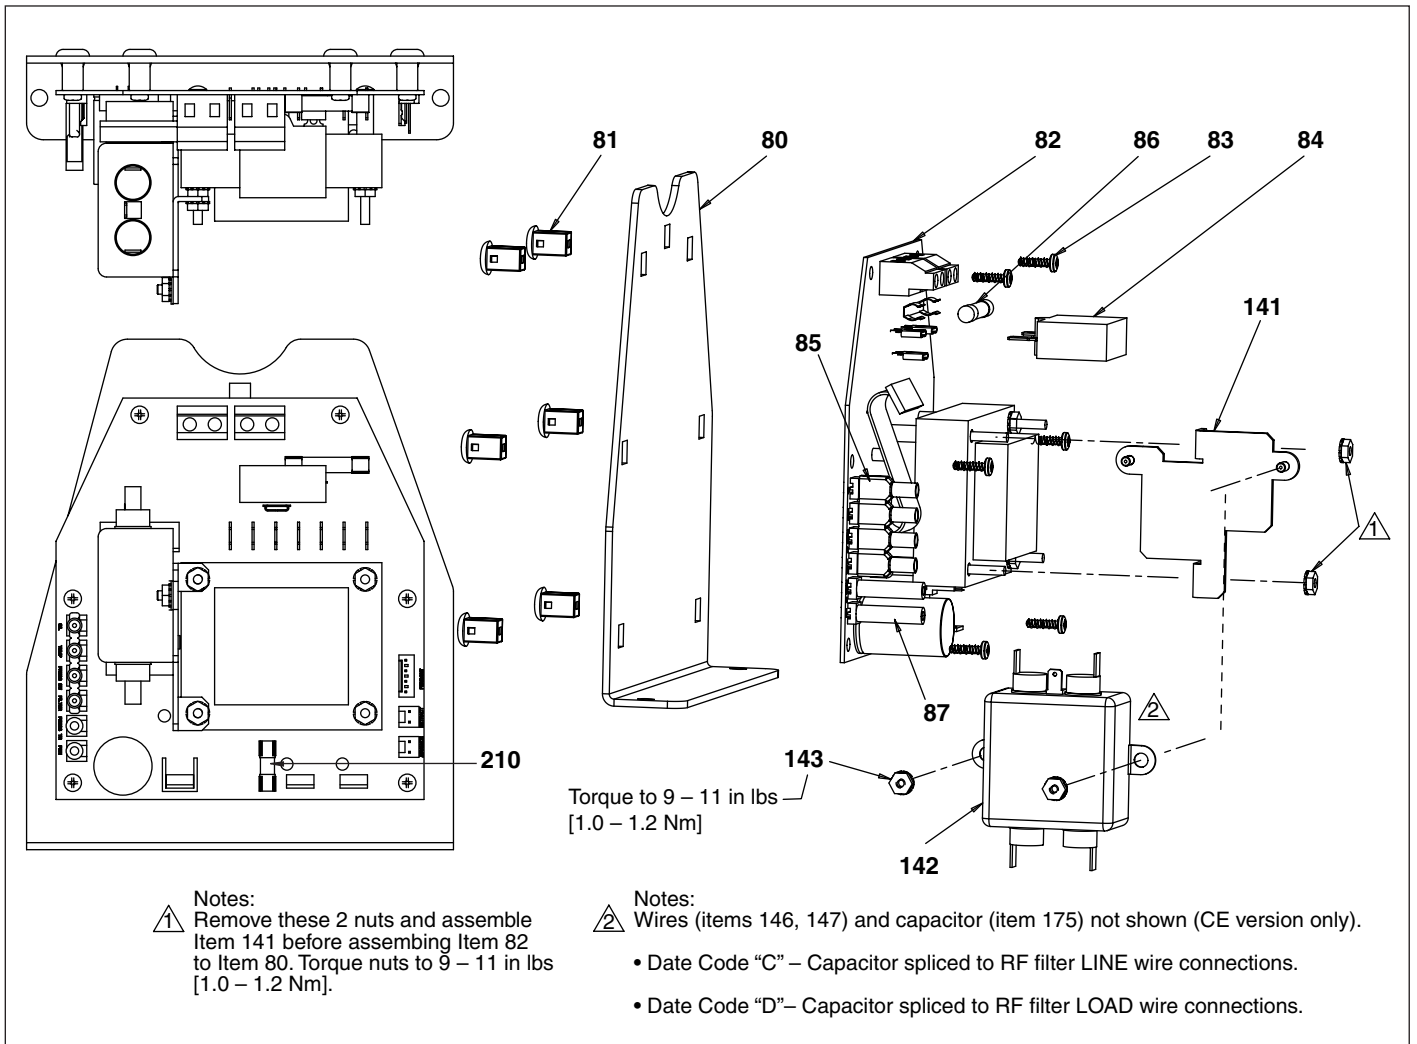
C, Middle Bracket Assembly, LCD Electric (Date Codes “C” and “D”)
